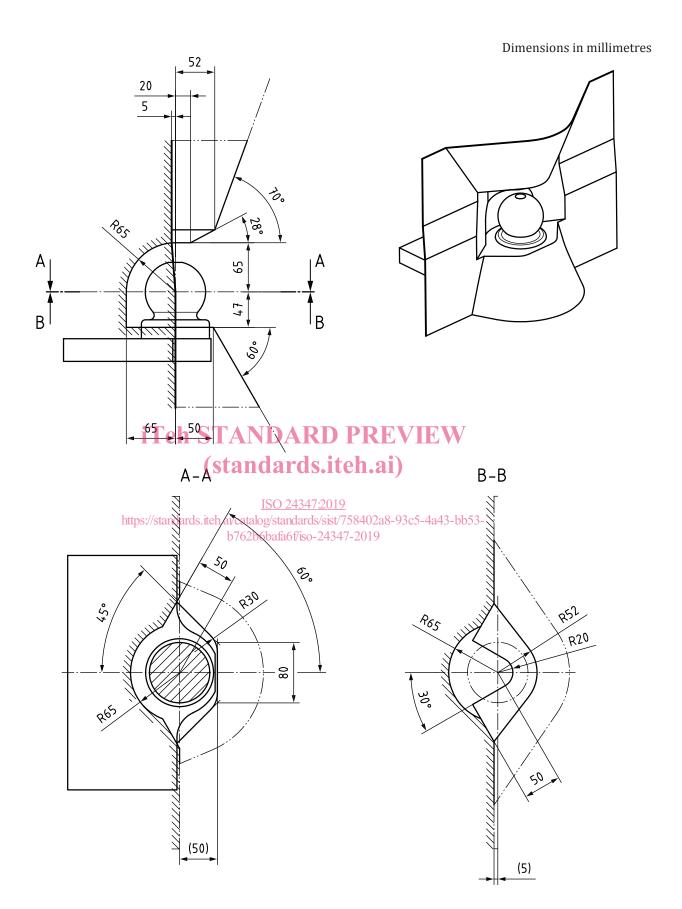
Minimum clearance zone for ball coupling device (only applicable for close position version)
